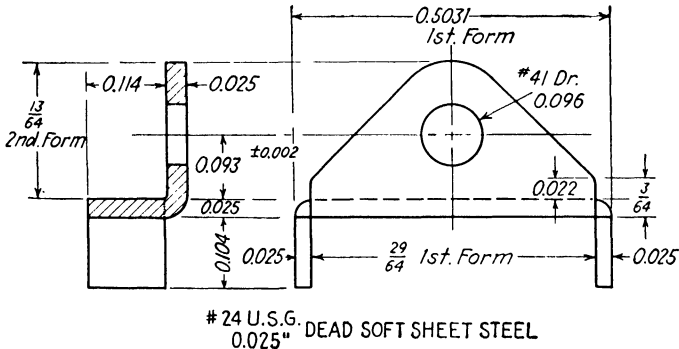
Specifications for the piece part called a "yoke," to be pierced, blanked, and formed progressively.
